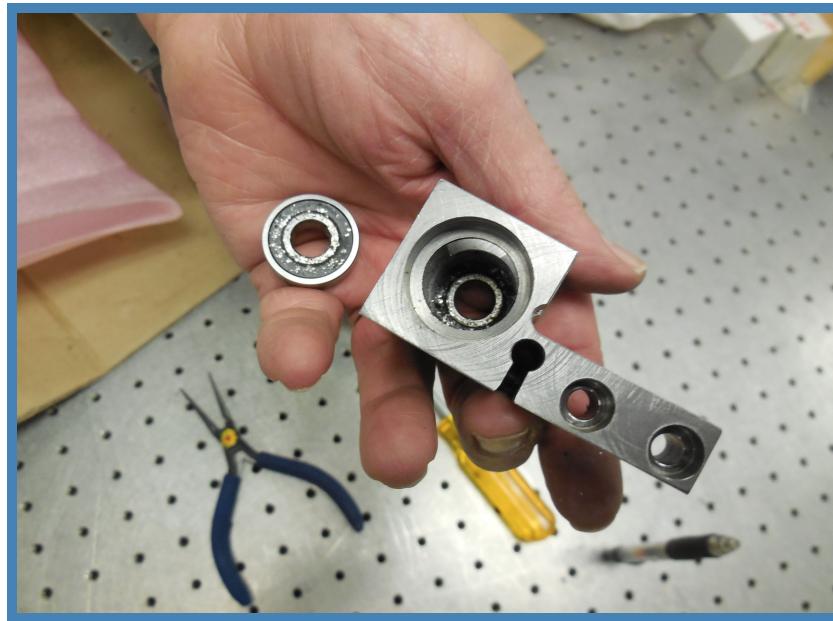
Badly damaged bearings of the tilt mechanism shaft.
